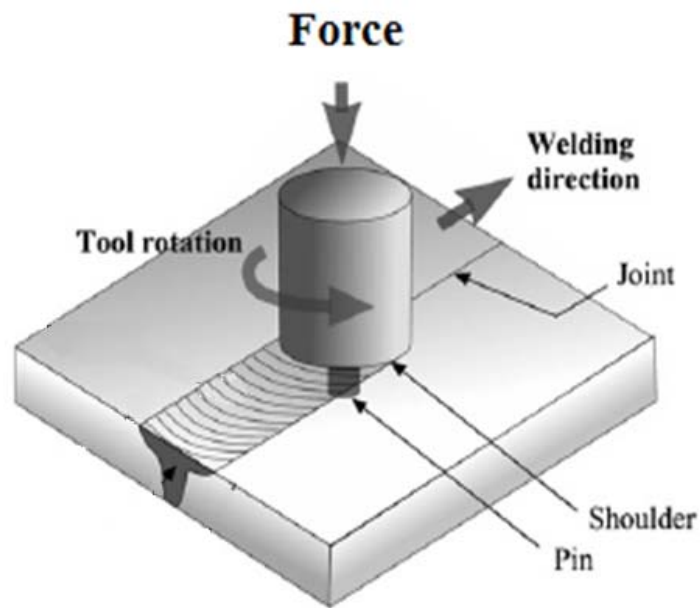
2 Schematic diagram of FSW butt welding process
